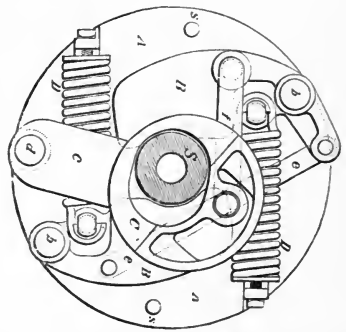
GOVERNOR—"SENTINEL" HIGH-SPEED ENGINE.
